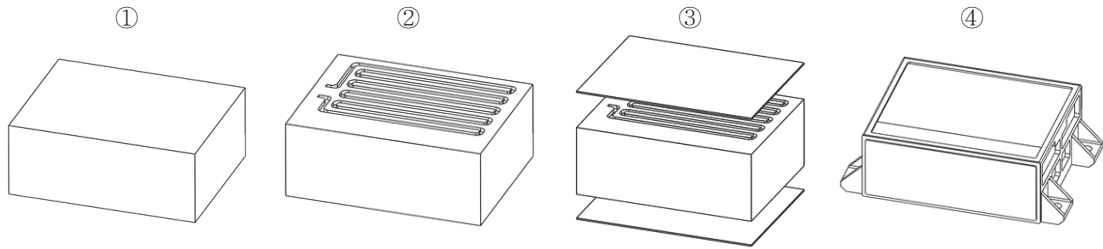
Manufacturing process of vacuum brazed housing (① : Raw material, ② : Cooling passage, ③ : Vacuum brazing and T6 Heat treatment, ④ : Detailed shape and assembly).
